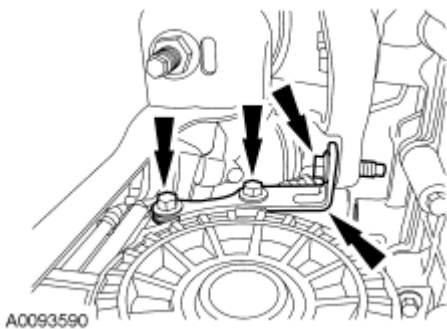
Identifying Upper PTU Bracket Bolts & Bracket
